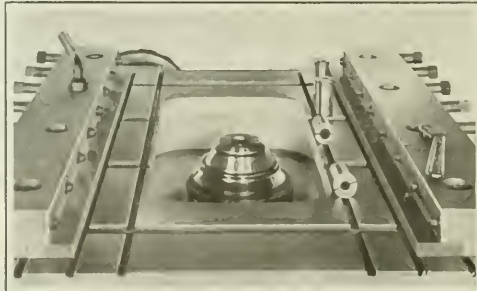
View looking down on Top Slide and Its Clamping Parallels and the Spindle Nose
